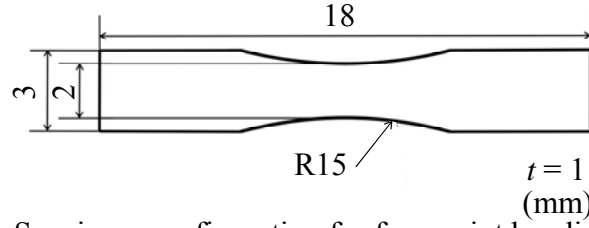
Specimen configuration for four-point bending fatigue tests.
